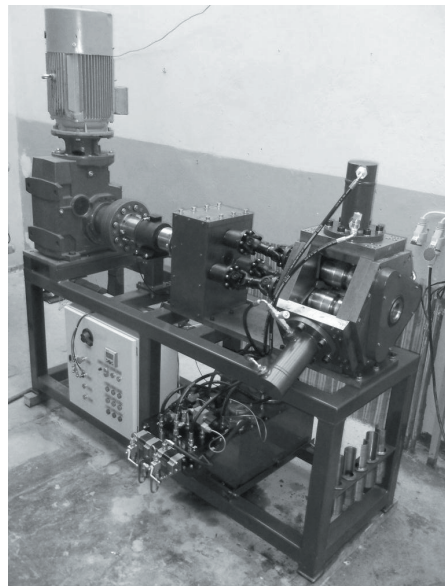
Machine used in the experiments of the rotary compression process for hollow shafts
